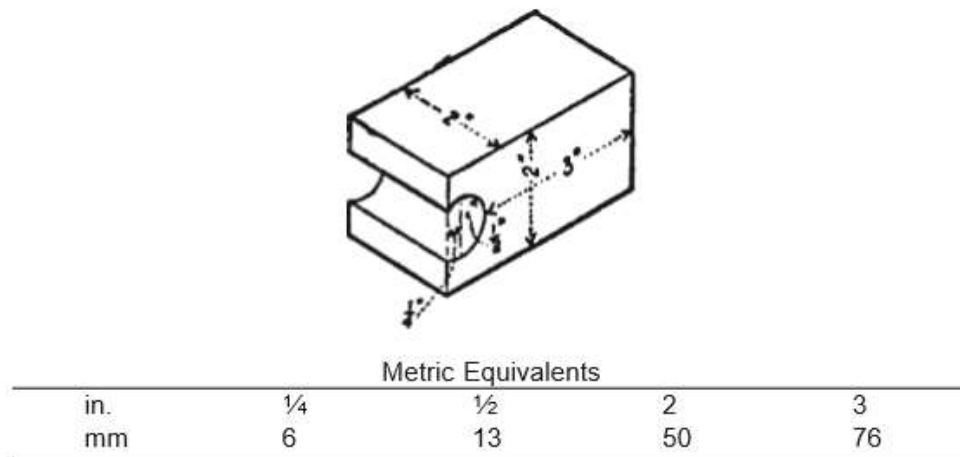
Cleavage test piece with and its dimensions (ASTM D 143)
